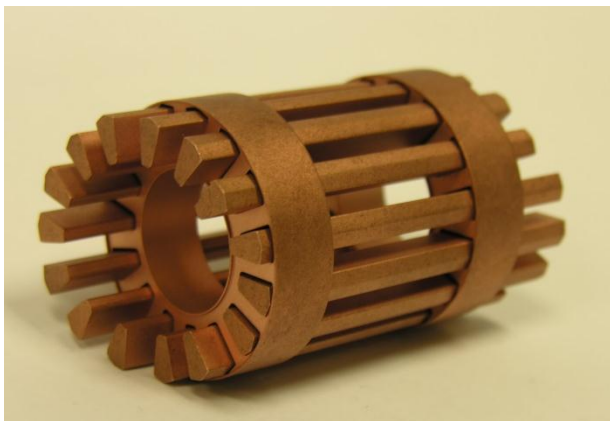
Fabricated GlidCop rotor bars and end rings.
